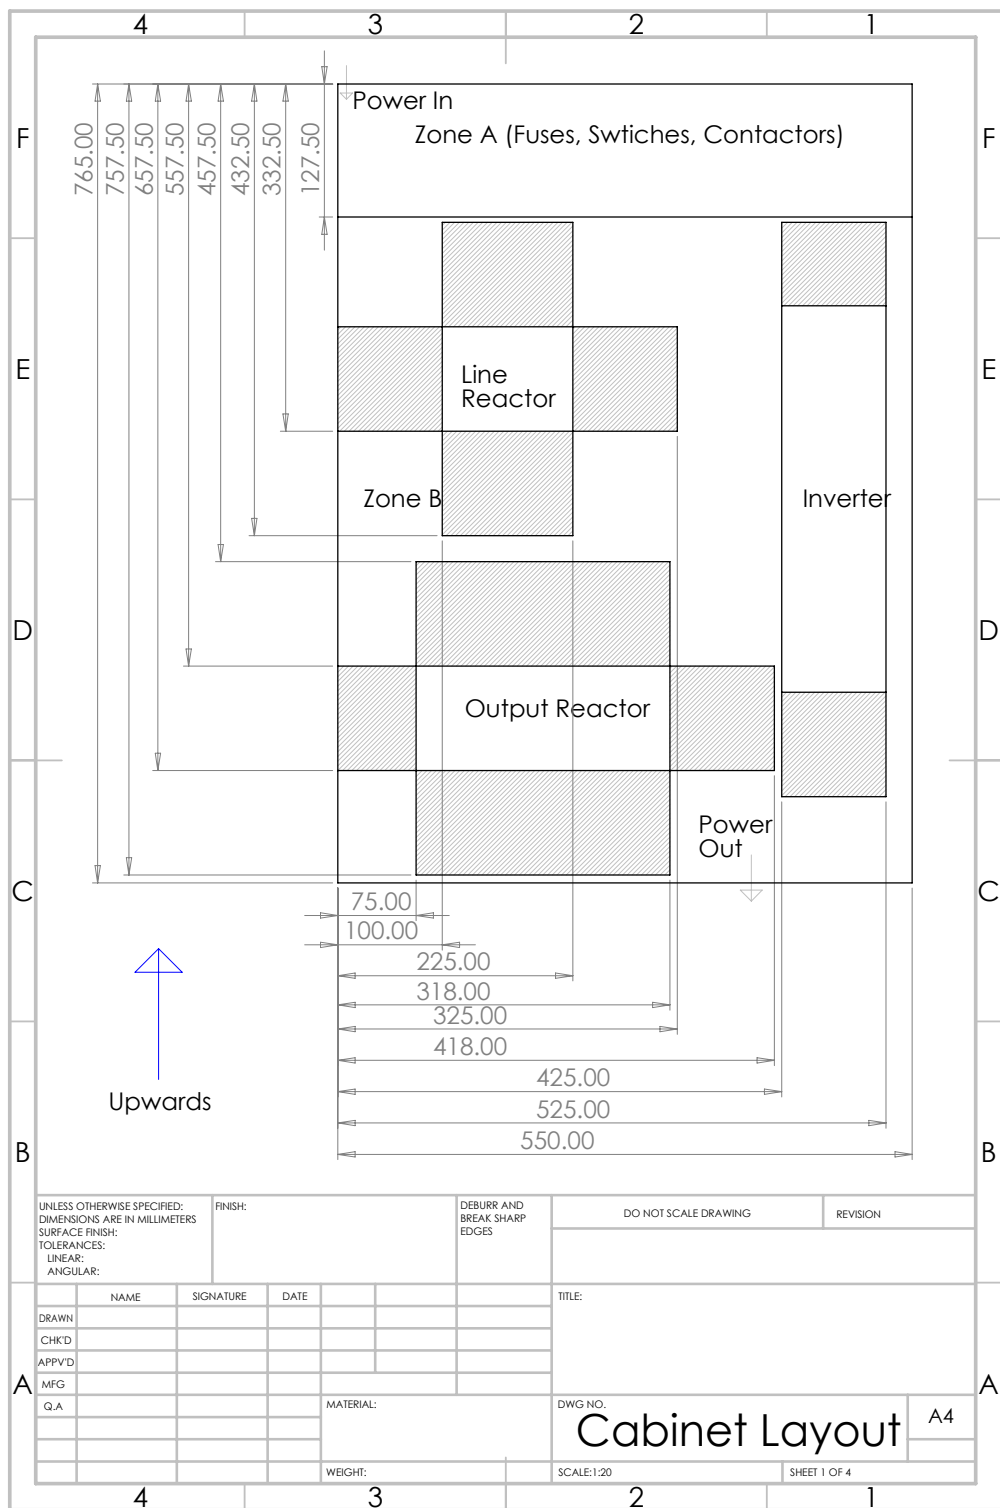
An engineering drawing of the back plate for the motor cabinet purchased from RS Online. The shaded sections around each of the components indicate ventilation zones for each of the components.
